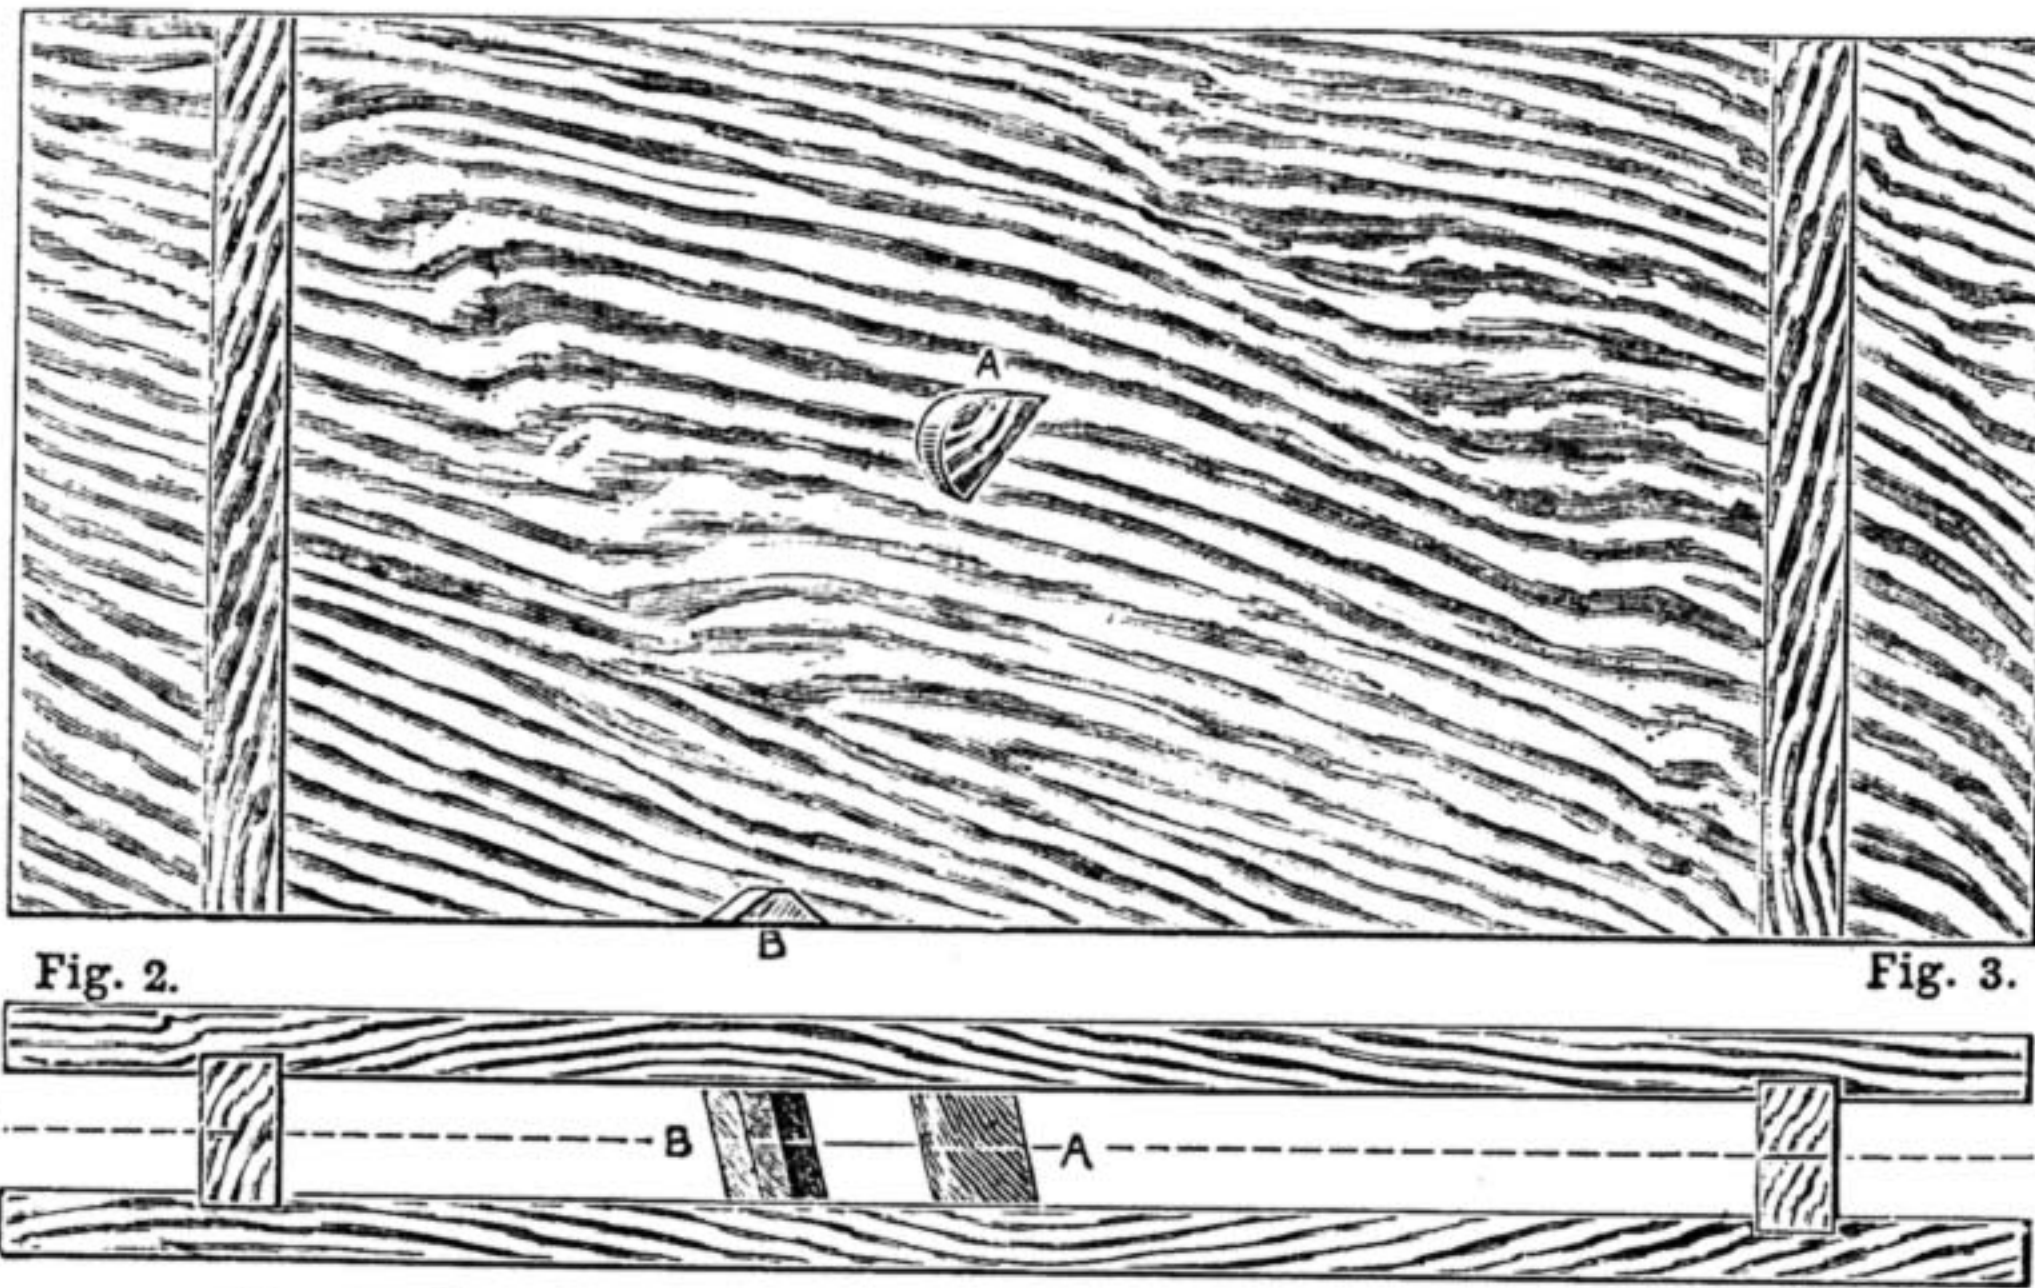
Core Box for Rebate Plane: Plan. Fig. 3.—Ditto: Section.
